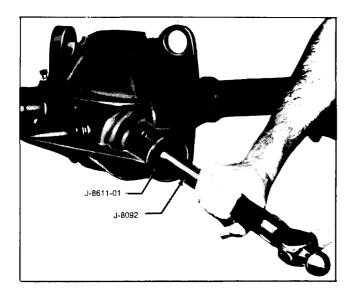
C-12 Installing Front Pinion Bearing Outer Race
